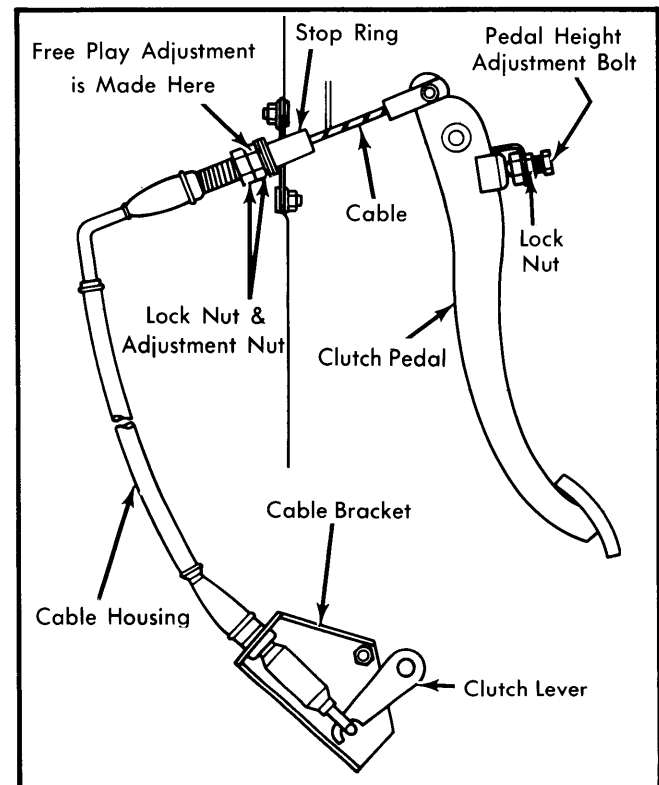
Installed View of Clutch Cable (RWD Models) with Adjustment Locations
